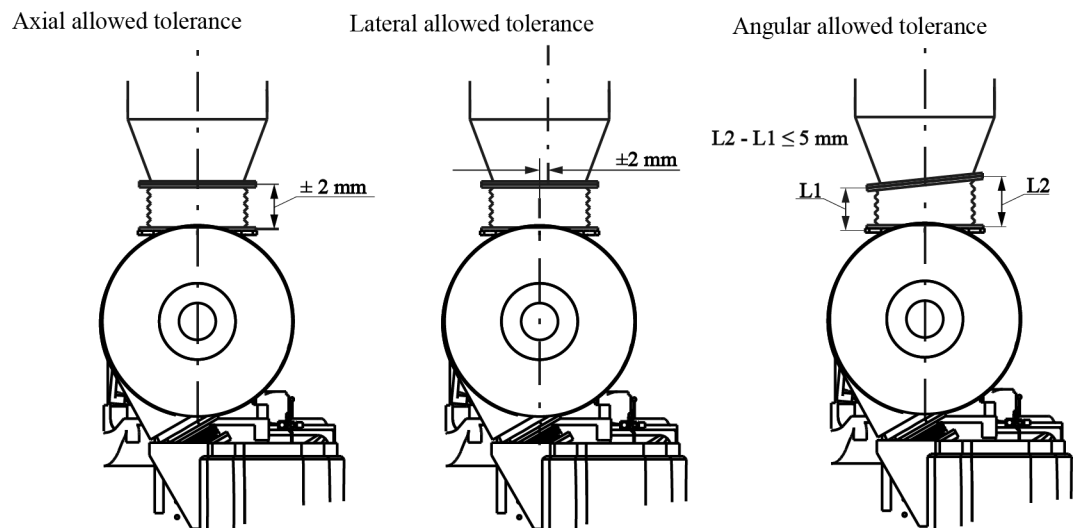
Installation tolerances for exhaust gas bellows
